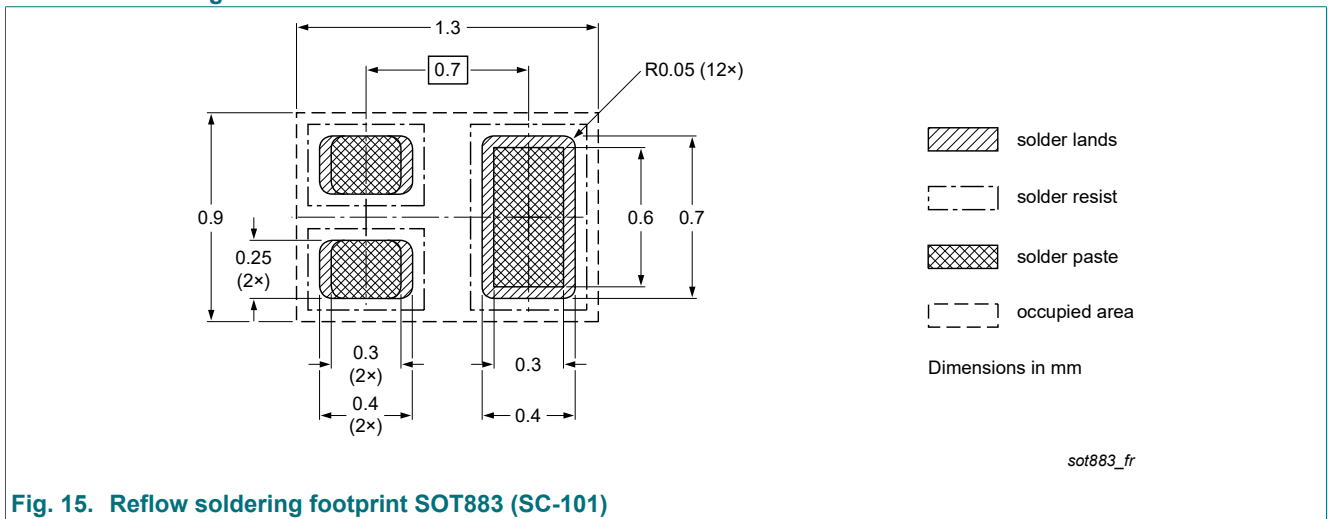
Reflow soldering footprint SOT883 (SC-101)
